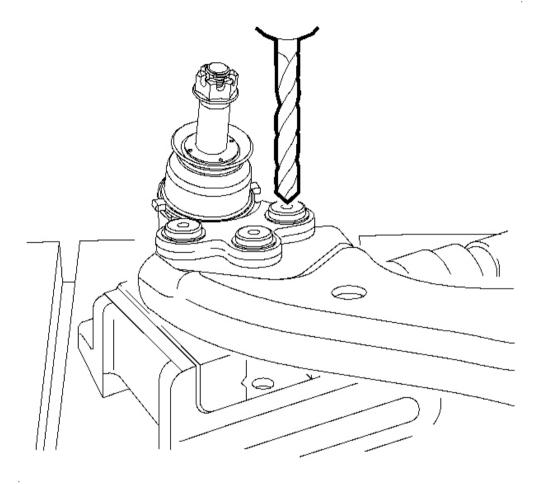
Removing Ball Joint Rivets Using A Drill Courtesy of GENERAL MOTORS CORP.
